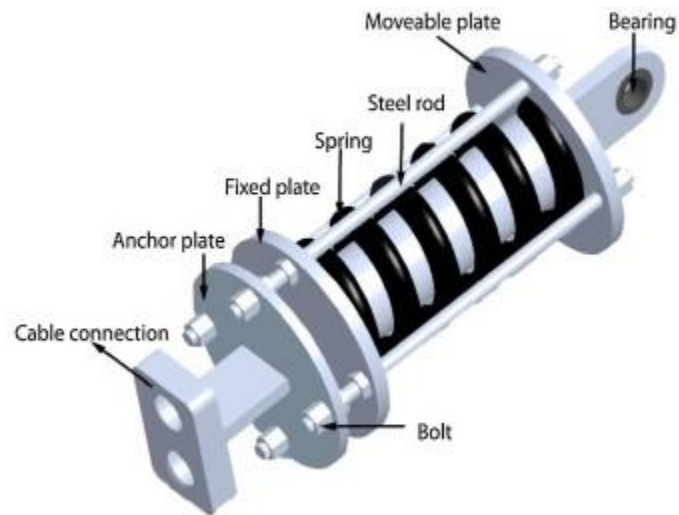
CAD model of the Spring Viscous Damper used in the damper-cable system [21].
